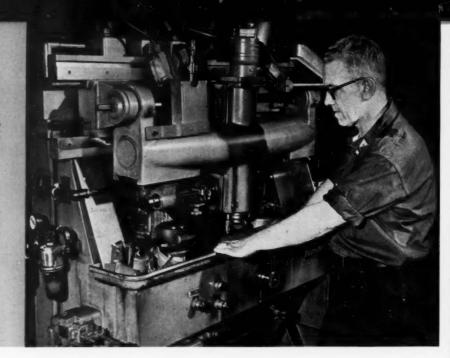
Loading the "Ferris wheel" fixture for the form grinders. A second, identical fixture is in work, so that production is continuous.
